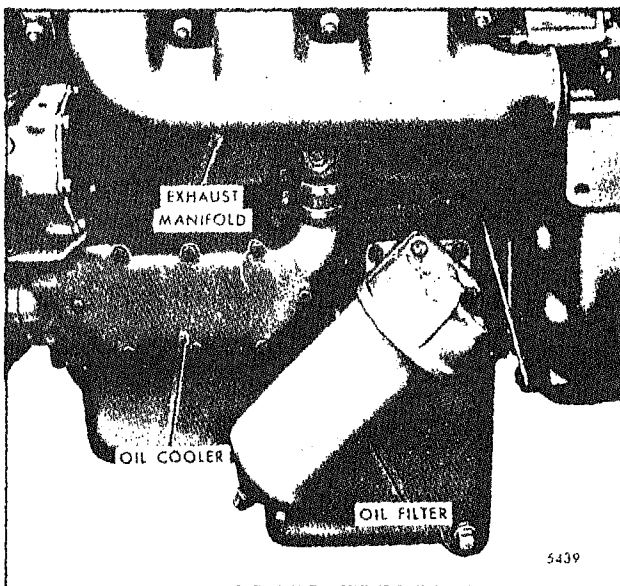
Typical Oil Cooler Mounting (6V-53 Engine Shown)
